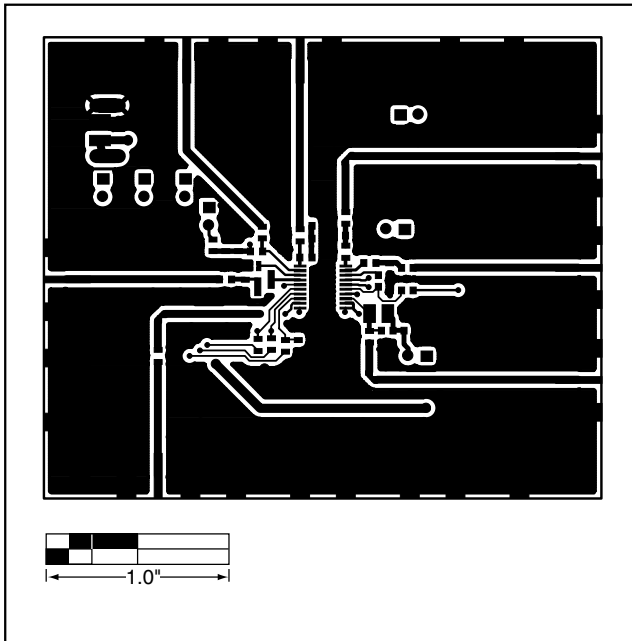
MAX2320/21/22/24/26/27 EV Kits PC Board Layout—Component Side
